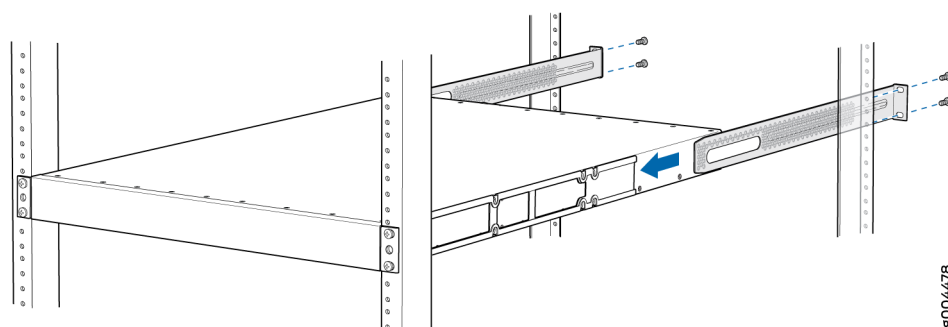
Slide Mounting Rail onto the ACX5096 Rear Mounting Blade
